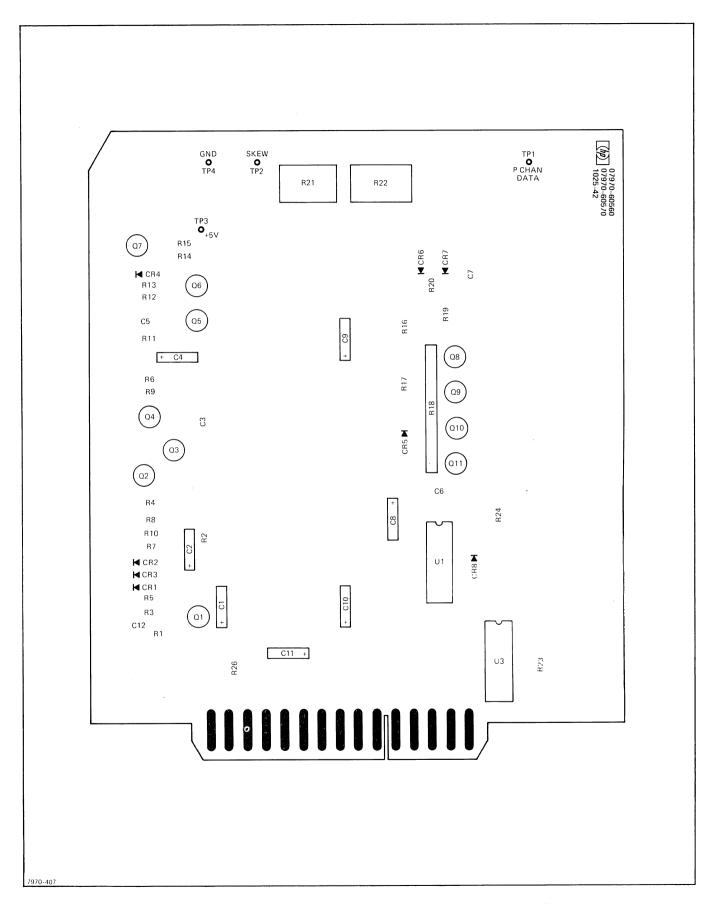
Single-Channel Read Data PC Assembly A18A2, Parts Location Diagram
